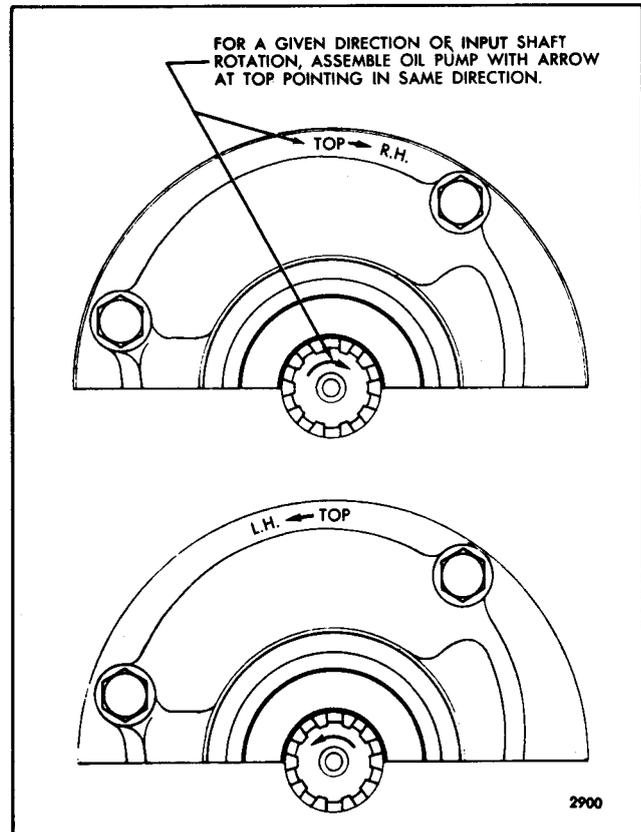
Location of Oil Pump Markings in Relationship to Input Shaft Rotation
